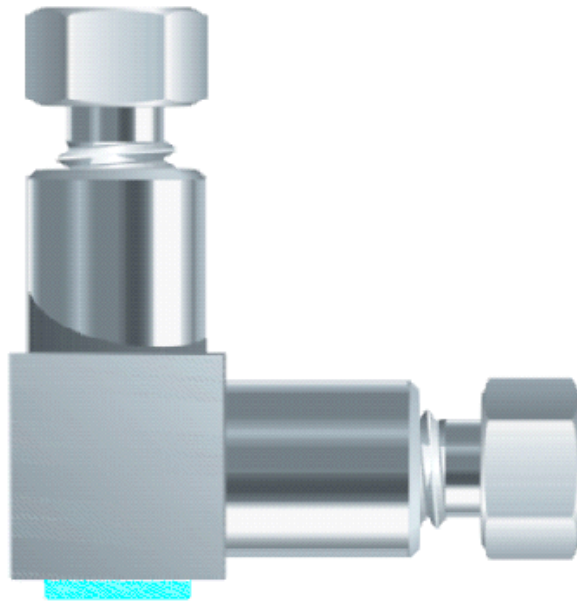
Side view of a stainless steel LWCFC fitting modified to hold a window.
